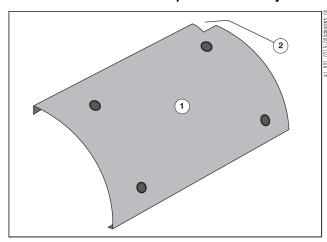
Super Blue delivery drum, sheet-metal jacket
